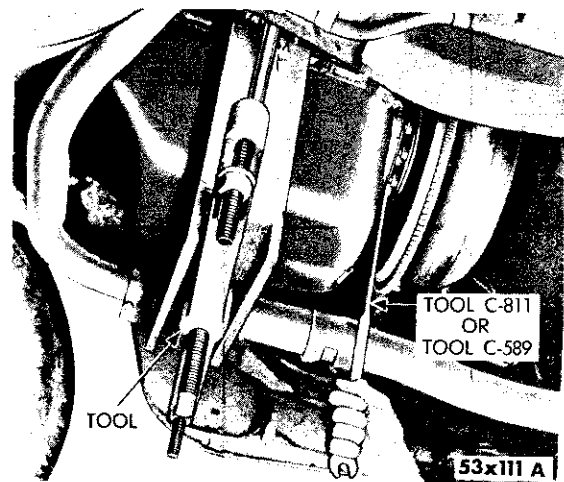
Removing or Installing Torque Converter Mounting Stud Nuts
